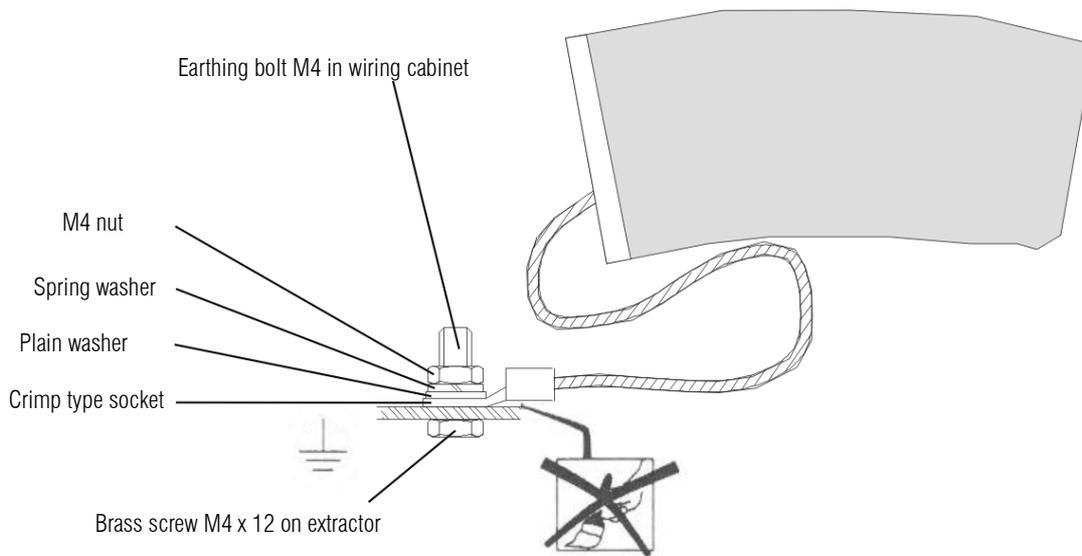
Shielding in wiring cabinet and on extractor for ribbon cable
